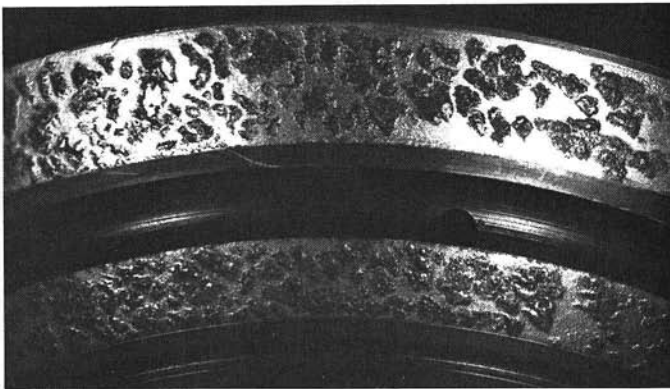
Fretting corrosion of thrust rings.
